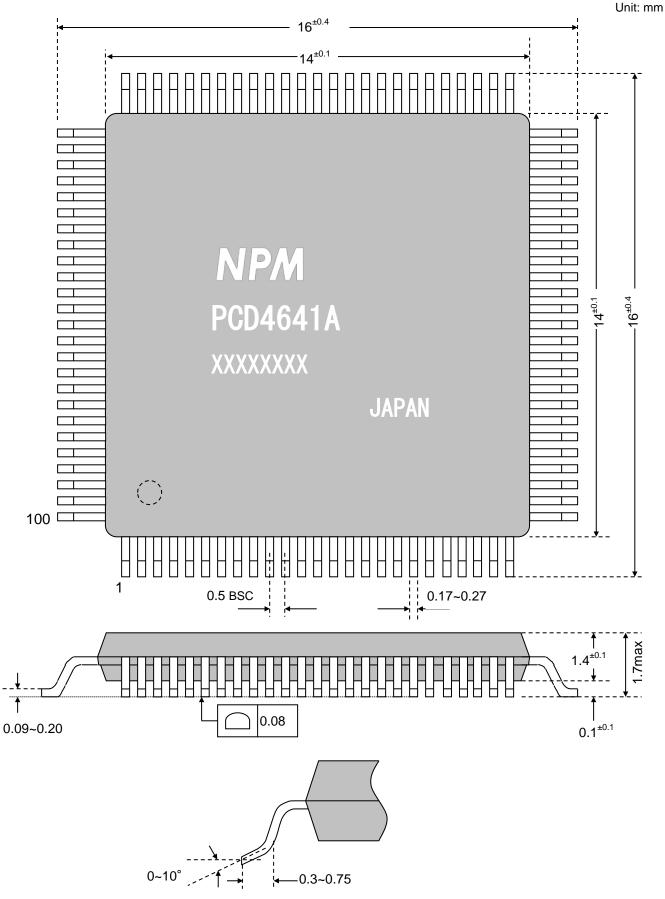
PCD4641A external dimensions (100-pin QFP)
